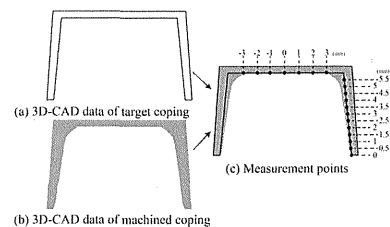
Schematic diagrams of 3D measurement for machining accuracy. The dimensional differences between (a) and (b) were inspected using inspection software. (c) Measurement points in the height and width directions.
